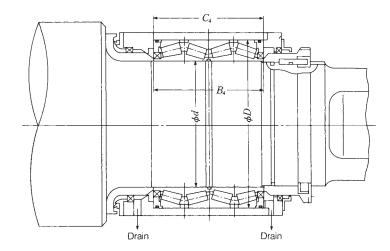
Typical assembly of sealed clean bearing for roll neck
